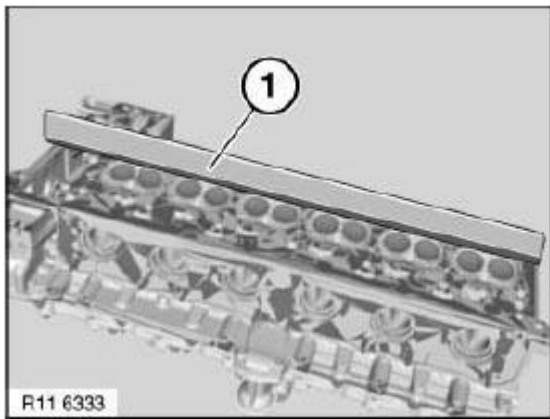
Checking Evenness Of Cylinder Head Sealing Faces Using Standard Straight-Edge
